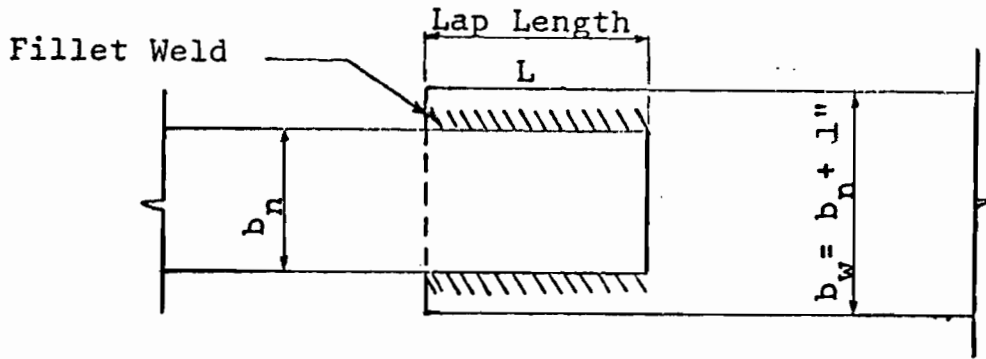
SINGLE LAP LONGITUDINAL FILLET WELD CONNECTION.
